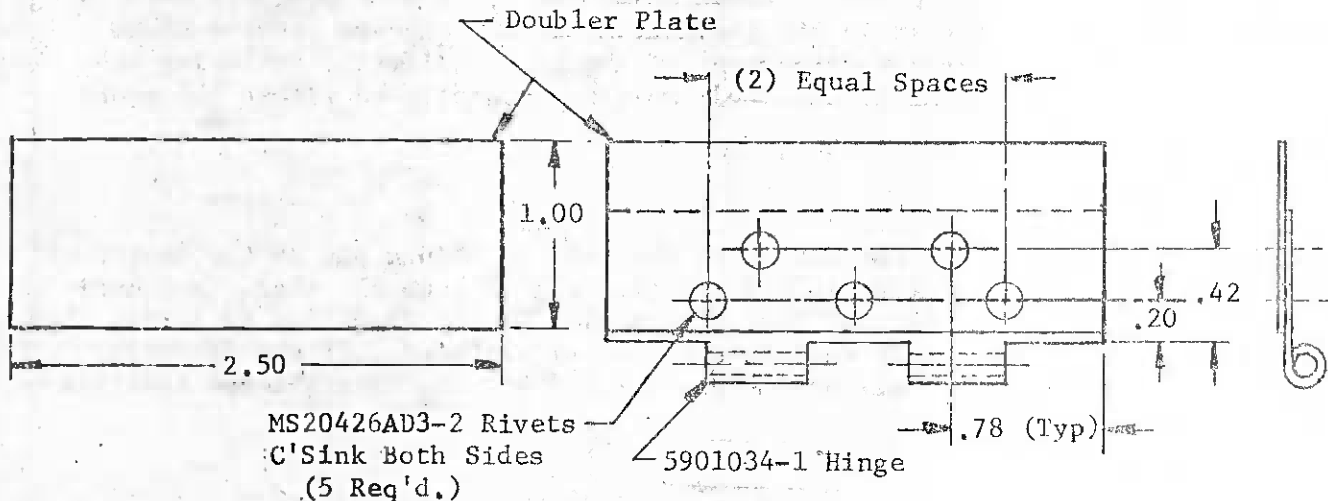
HINGE HALF DOUBLER PLATE ASSEMBLY
